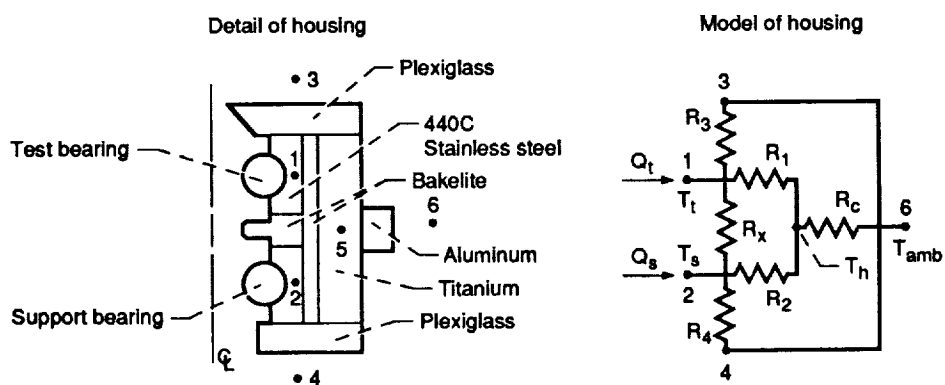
Electrical analogy to heat transfer in bearing housing.
